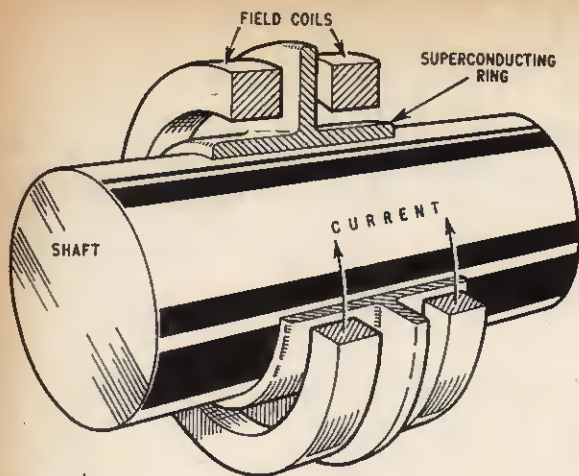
Cutaway view of an experimental form of superconducting bearing
